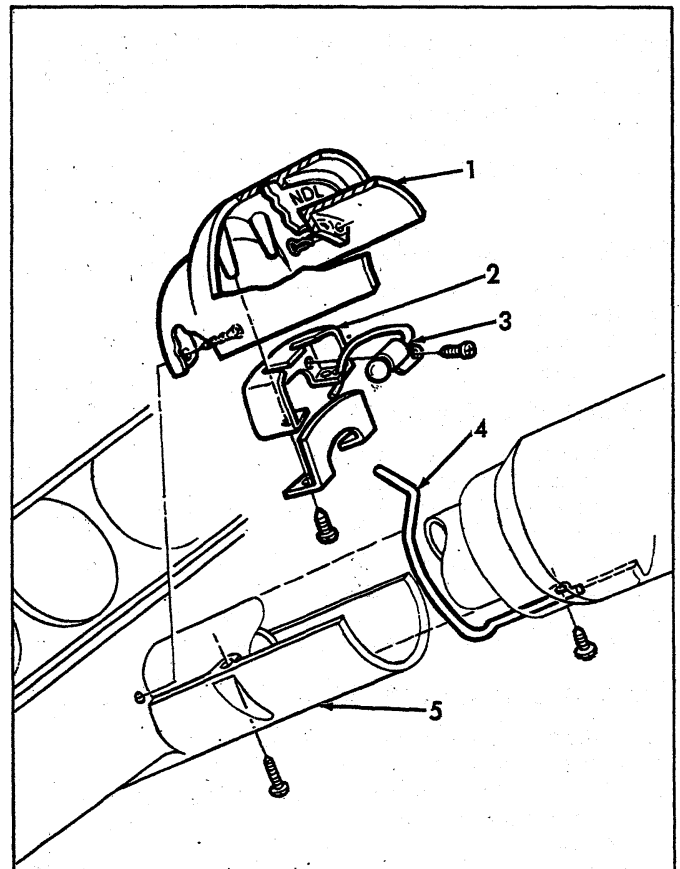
Dial Quadrant Lamp — Chevrolet
